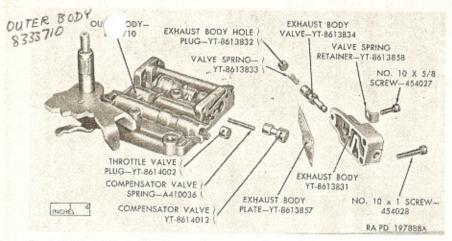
Exhaust body and compensator valve removed from control valve outer body.
